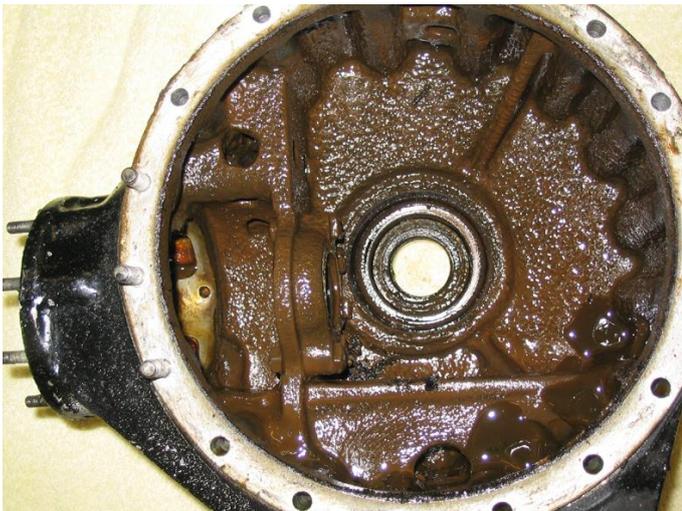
Just about the view you should expect after taking off the left side plate and removing the crown wheel assembly. Notice the labyrinth of holes at the 10 o'clock position which makes hard work of cleaning this Bentley R type case.
